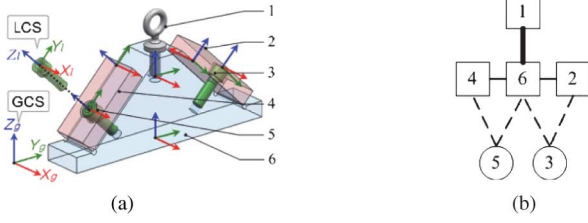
Example of components with inclined assembly direction: (a) assembly and (b) contact relations.
